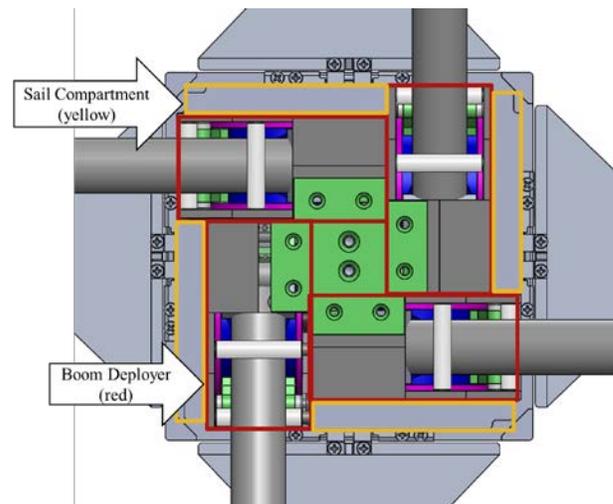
Bottom view of deployed drag sail assembly with sail quadrants hidden.
